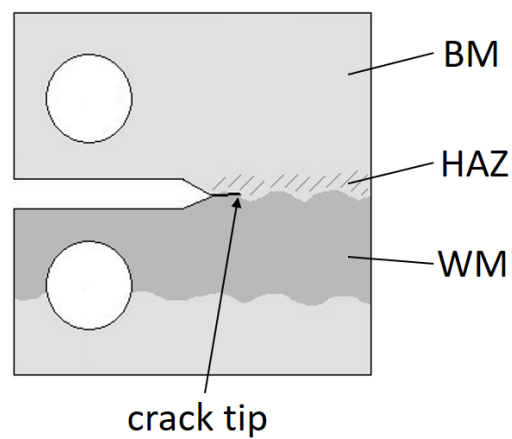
A schematic of the welded CT specimen, showing base metal (BM), weld metal (WM), heat affected zone (HAZ) near the weld line and a pre-crack in the HAZ.
